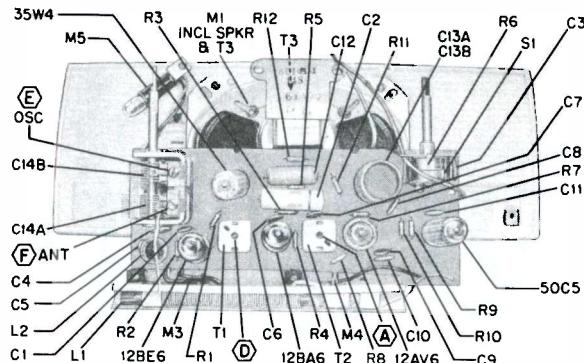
Top View of 5D4 Chassis Showing Location of Components and Alignment Points
